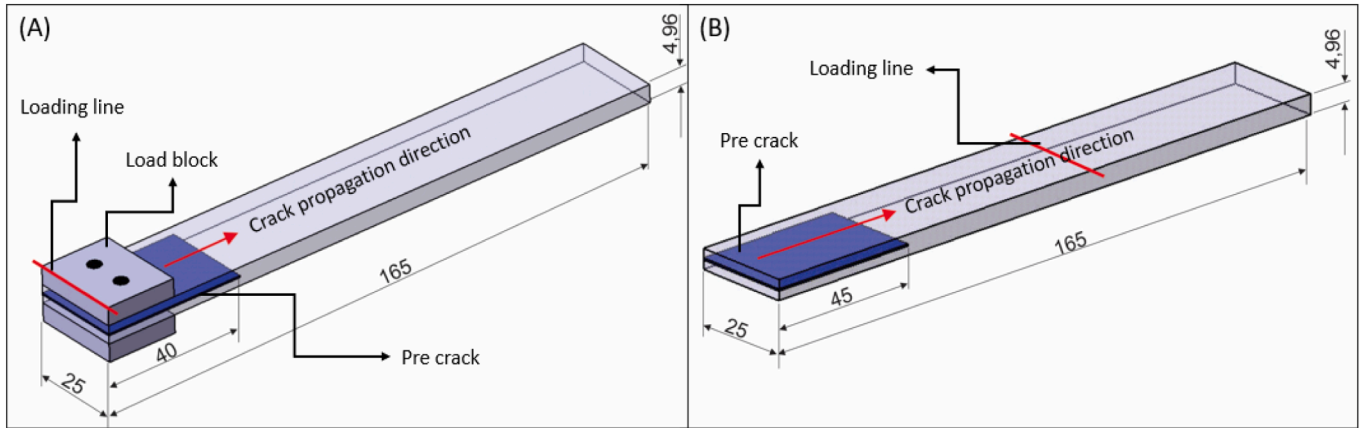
Geometry and dimensions of the samples for (A) DCB and (B) ENF tests.
